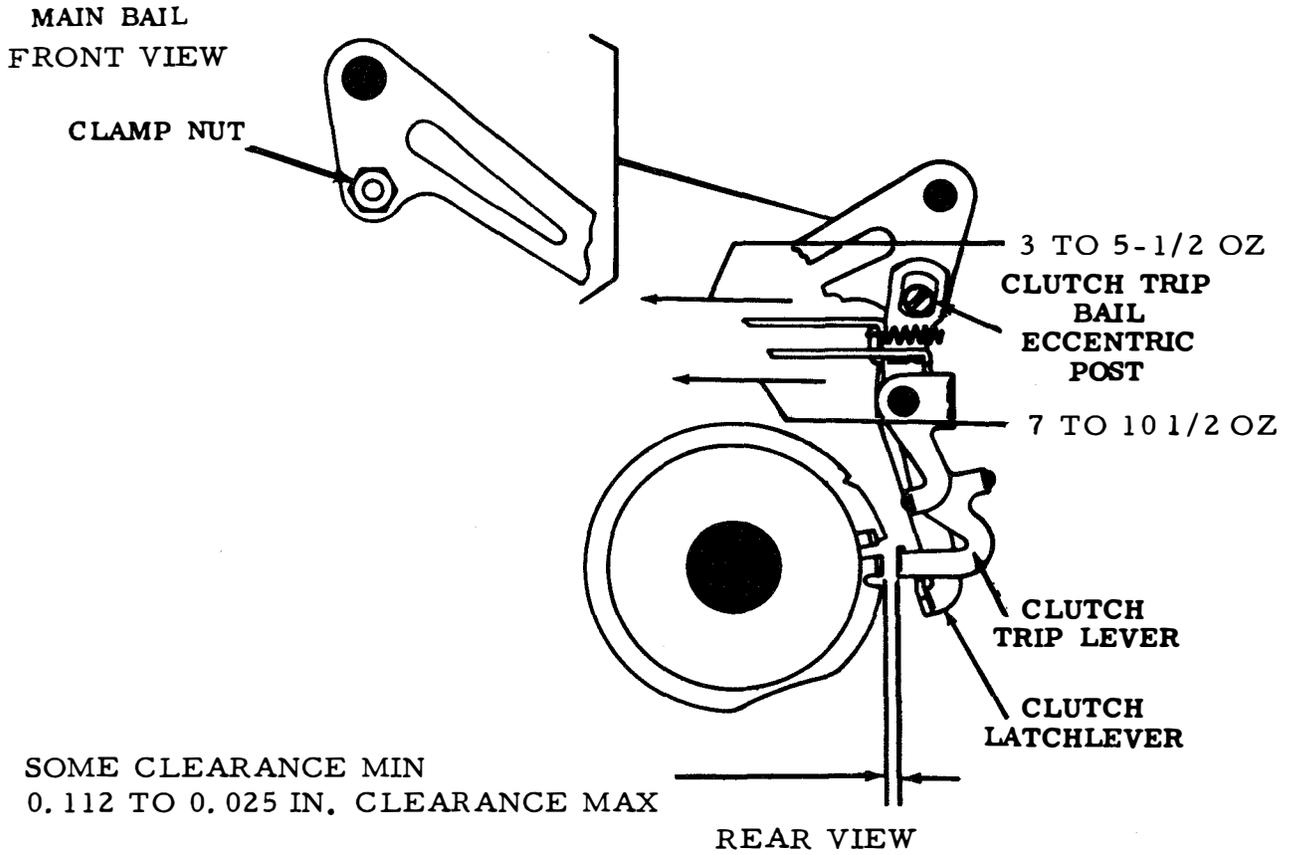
Clutch Trip Lever, Clutch Trip Lever Spring, and Clutch Latchlever Spring
